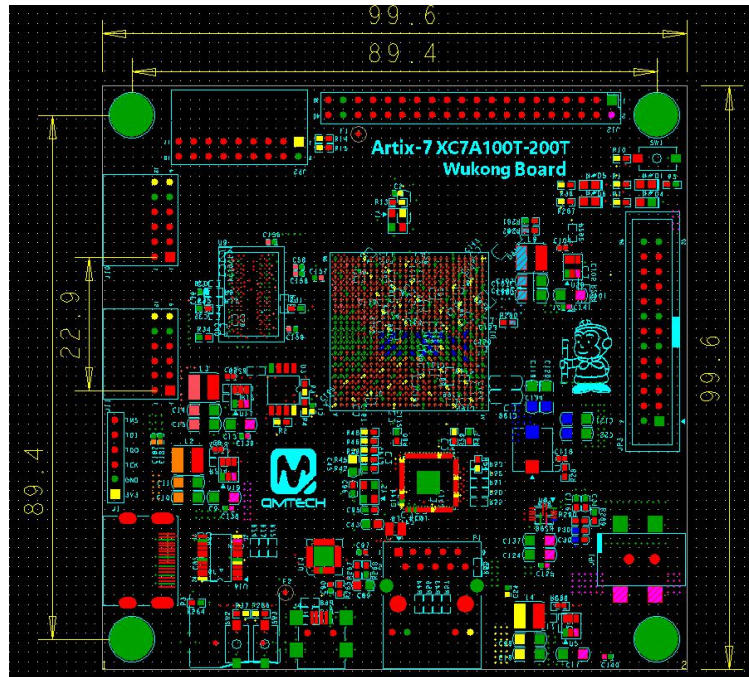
QMTECH XC7A200T Wukong Board Dimension
